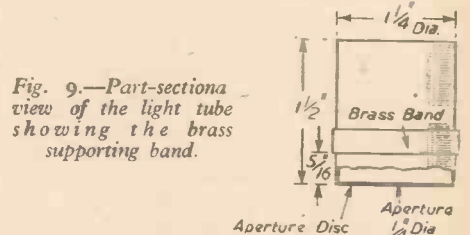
Part-sectional view of the light tube showing the brass supporting band.
